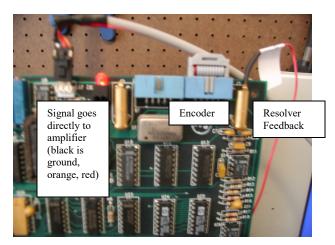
, Install the axis card into slot 13 of the 1060 mother board. The axis card requires three cables connections. (Signal cable, the encoder ribbon cable and the resolver feedback cable.) (Resolver feedback is used only when using Fadal Axis cards with DC software).
